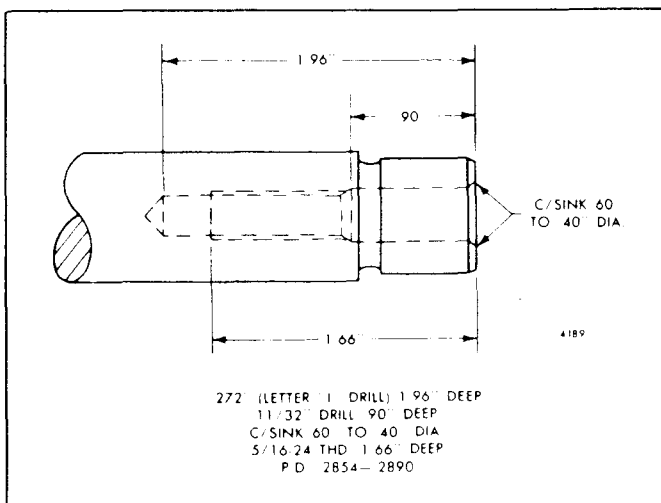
Dimensions for Reworking 6V Blower Rotor Shafts
